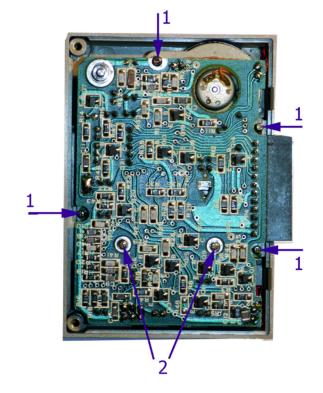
These screws have to be removed first: 1: Four screws to remove drive assembly from upper shell;
